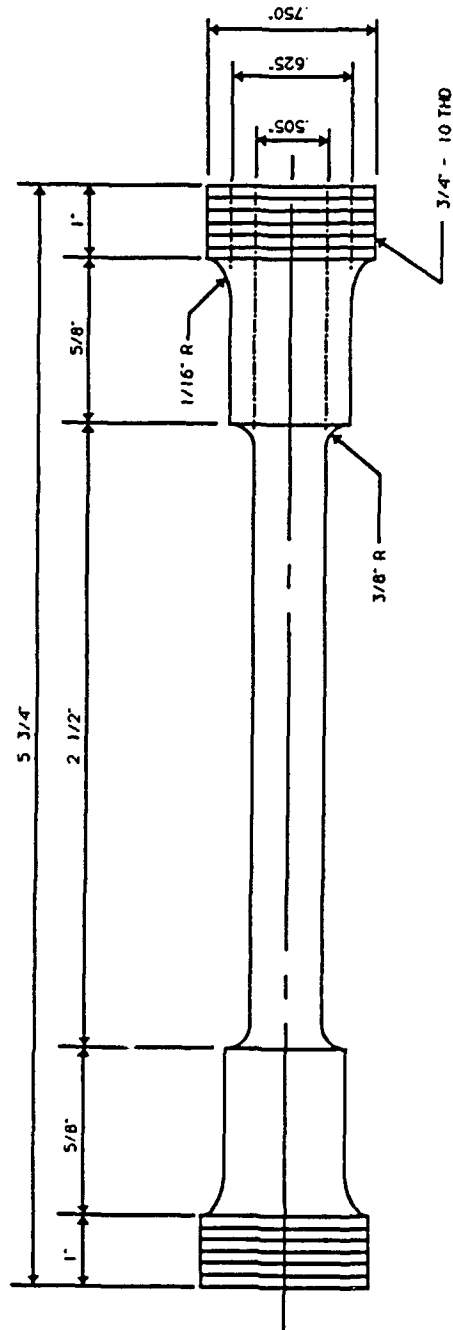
FIG. A ASTM TYPE 2 AXIAL LOAD TENSION SPECIMEN
